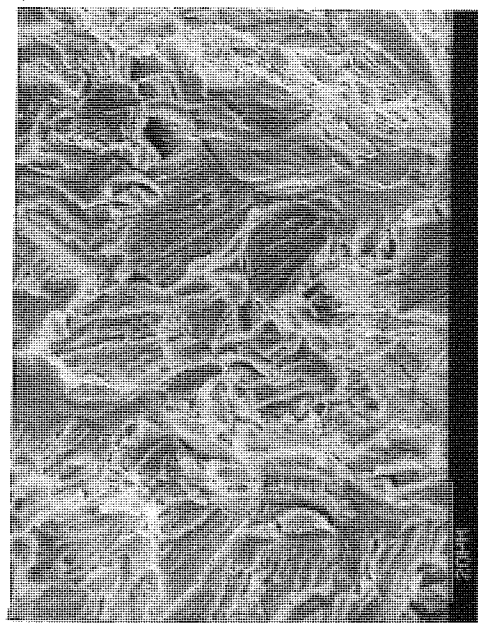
Detail of Plate 63 showing fracture surface of "fisheye", the area observed was just above the tip of the crack .
